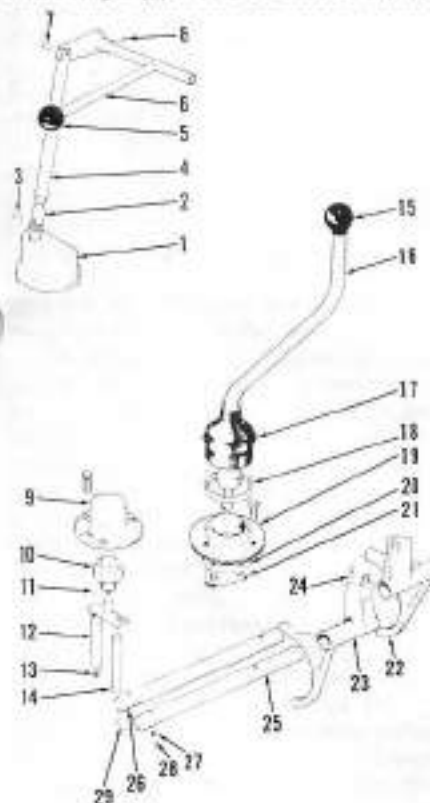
Exploded view of shift controls for Hydra Shift models. Valve (7) is shown as (4) in Fig. 120 and forks (22 & 23) move sliding dog clutches (16 & 22—Fig. 115).
